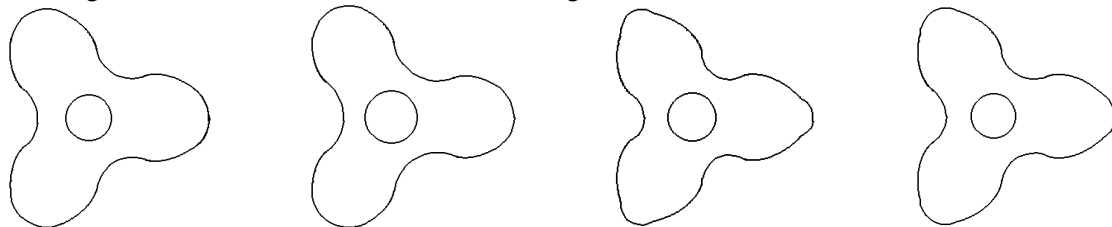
Improved involute rotor and traditional involute rotor (a)Traditional rotor(b)Base circle 90 involute rotor(c)Base circle 80 involute rotor(d)Base circle 70 involute rotor
